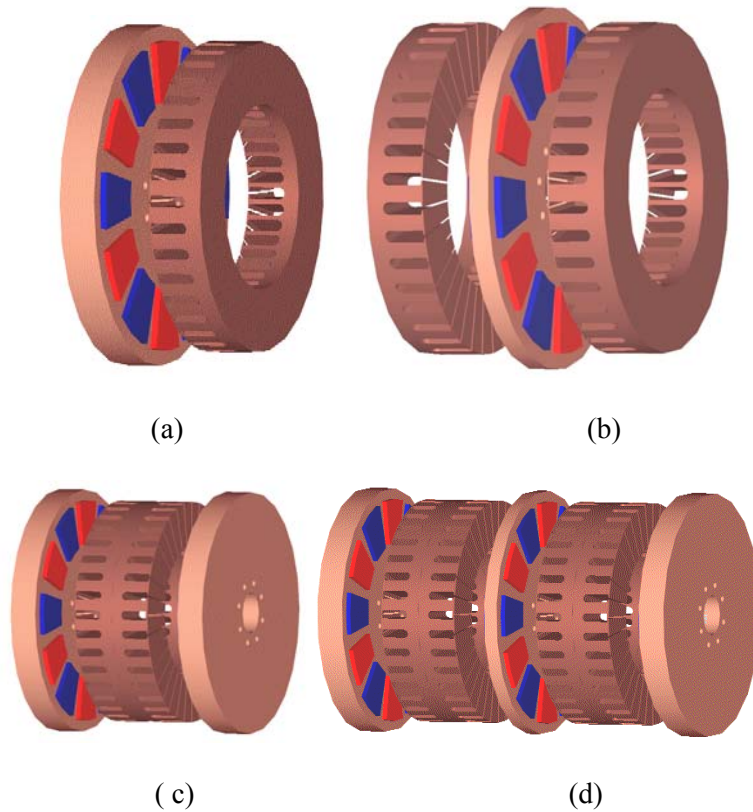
Single-sided AFPM motor, b. double-sided AFPM motor with internal rotor, c. double-sided AFPM motor with external rotors, d. multi stack AFPM motors [4].
